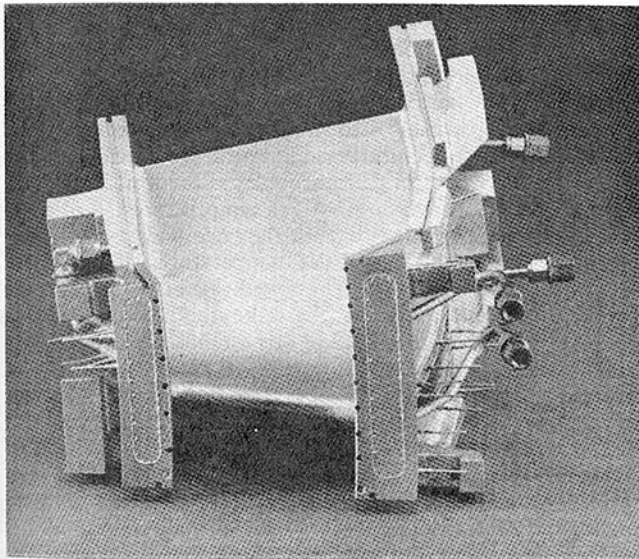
Second-stage nozzle braze assembly as viewed from the leading edge
